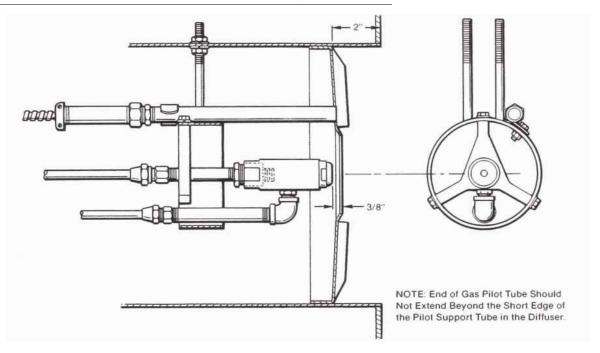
MM 34-63 Drawer Assembly Dimensions
